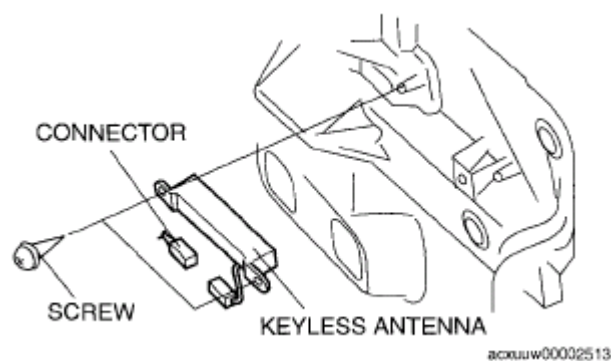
Identifying Keyless Antenna & Connector With Screw (Exterior, LF/RF)
